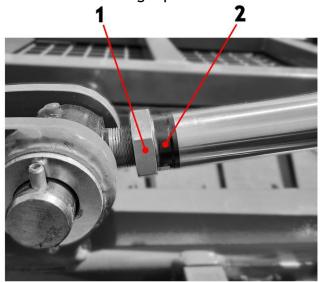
View of actuator with nut for levelling the machine (1 - lock nut; 2 - adjustment spot with spanner 41)
